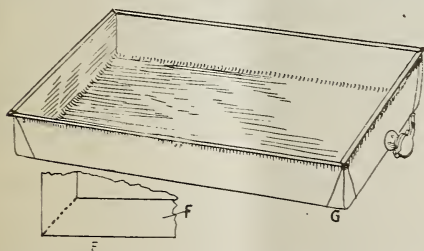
Galvanized tank of one piece; G, method of lapping the corners; F, flat metal showing how to clip corner before turning up.
